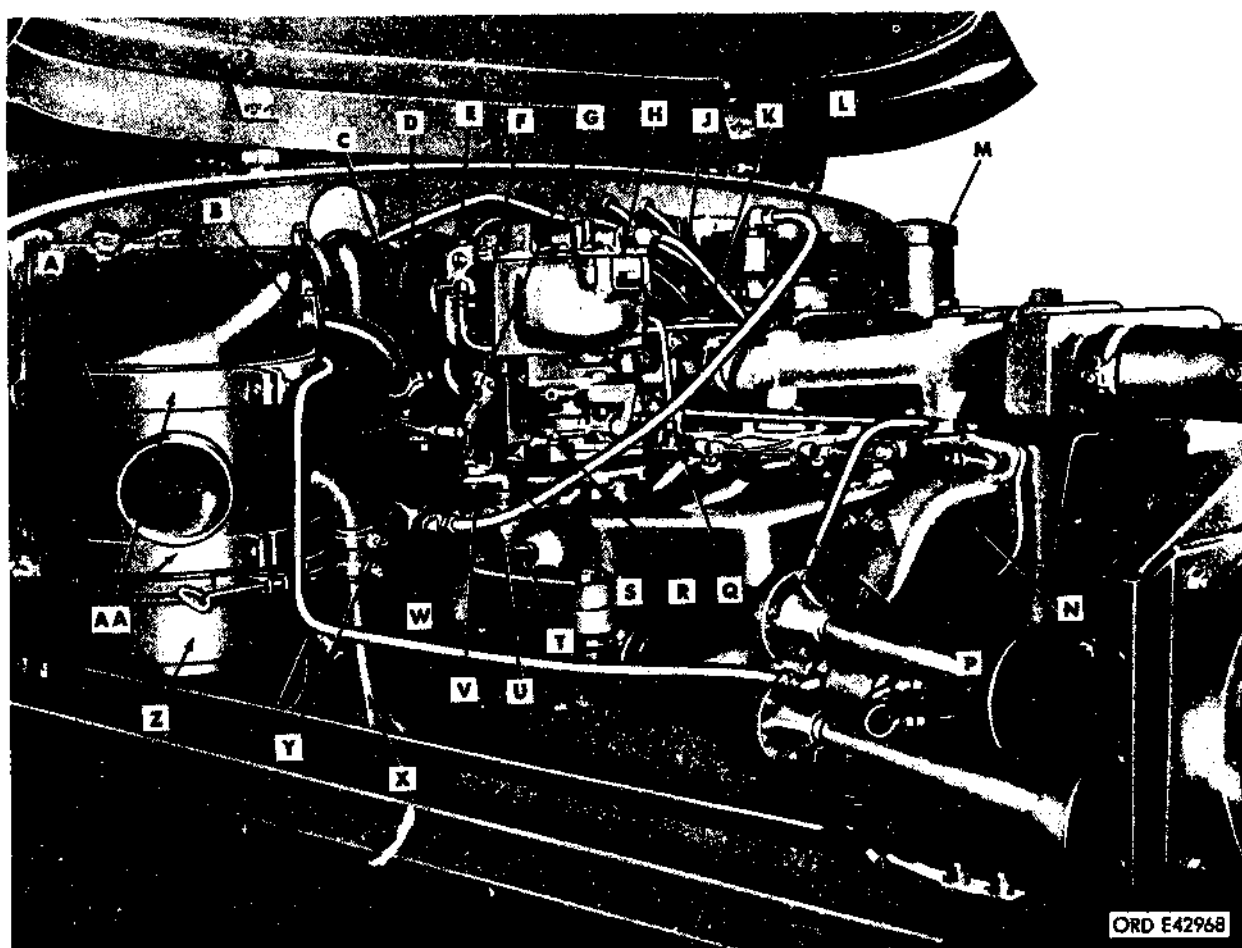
Clyburetor and manifolds installed on right side of engine.
